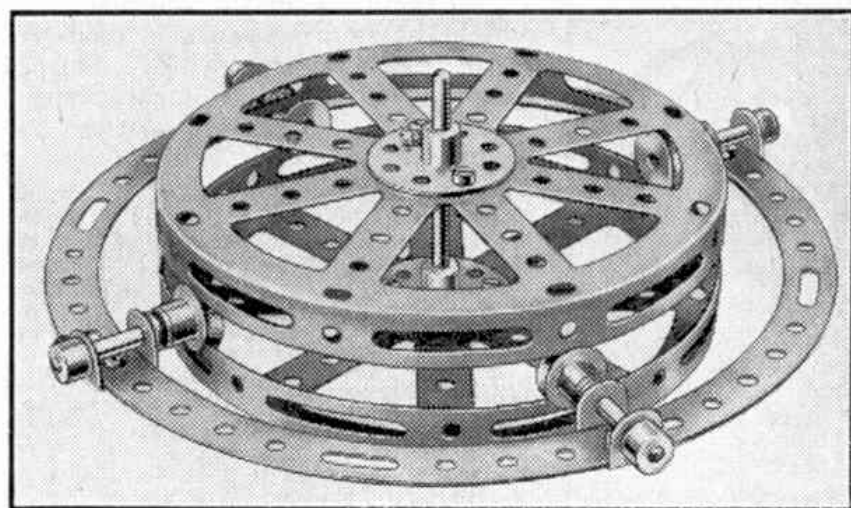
Hub Discs and a Circular Strip form the main parts of this useful roller bearing.
